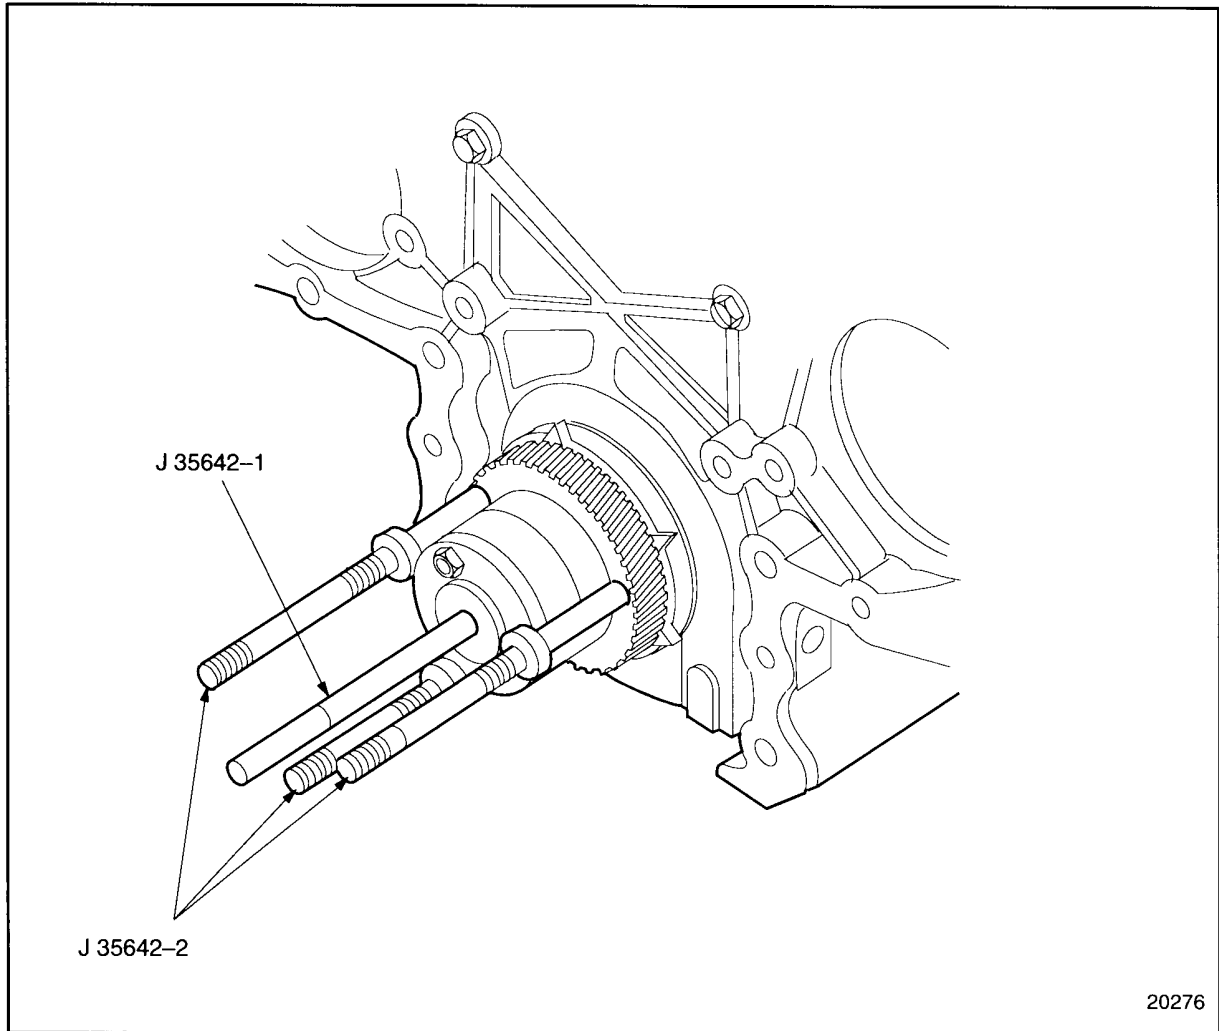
Installation of Crankshaft Timing Gear Removal Tools
